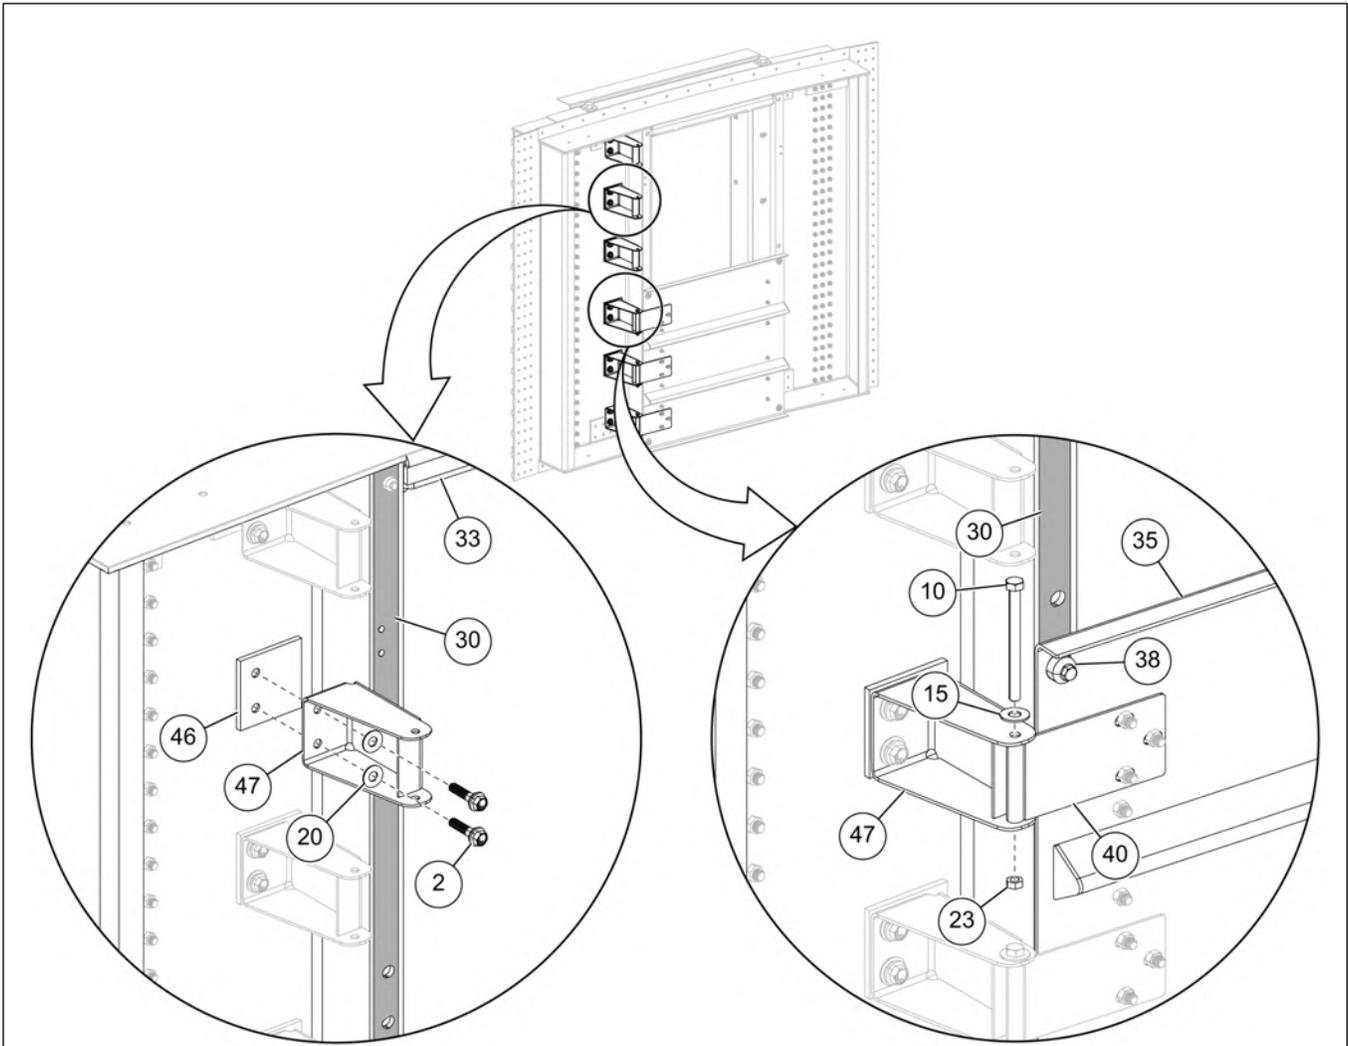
Installing the top and bottom inside door panels - 2 post
